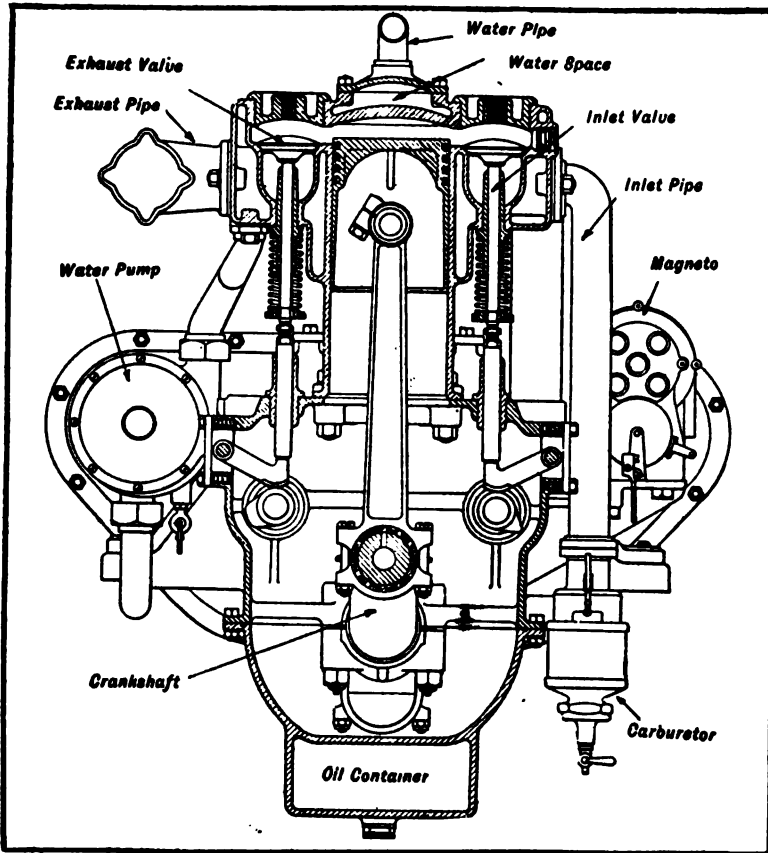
Sectional view of rear cylinder of gasoline-engine with important parts indicated.
